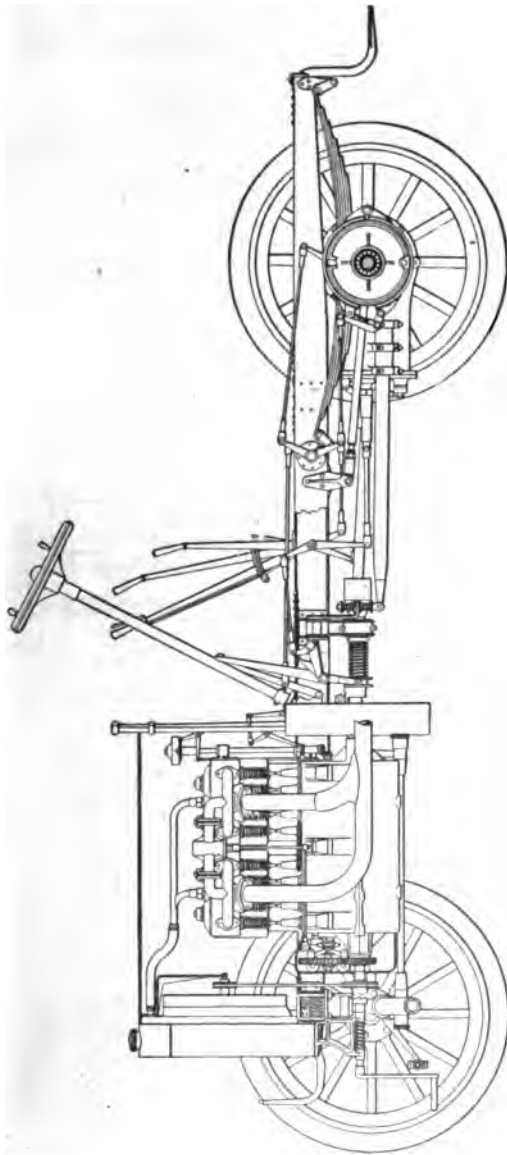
Sectional Elevation of the Packard Chassis.
